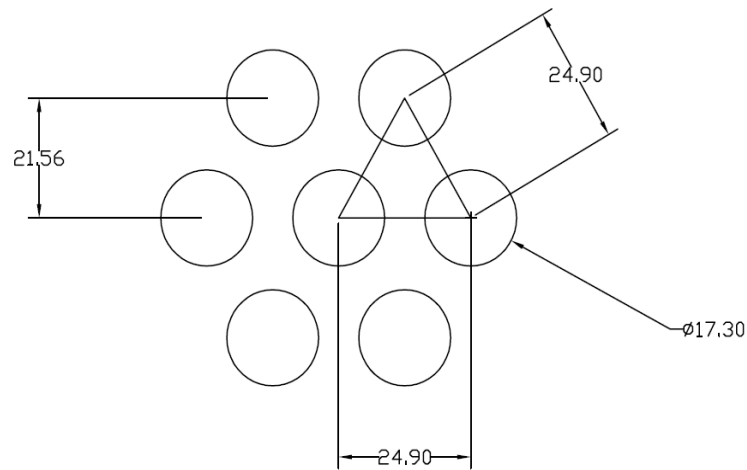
Tube bundle drawing (Dimensions are in millimeters)
